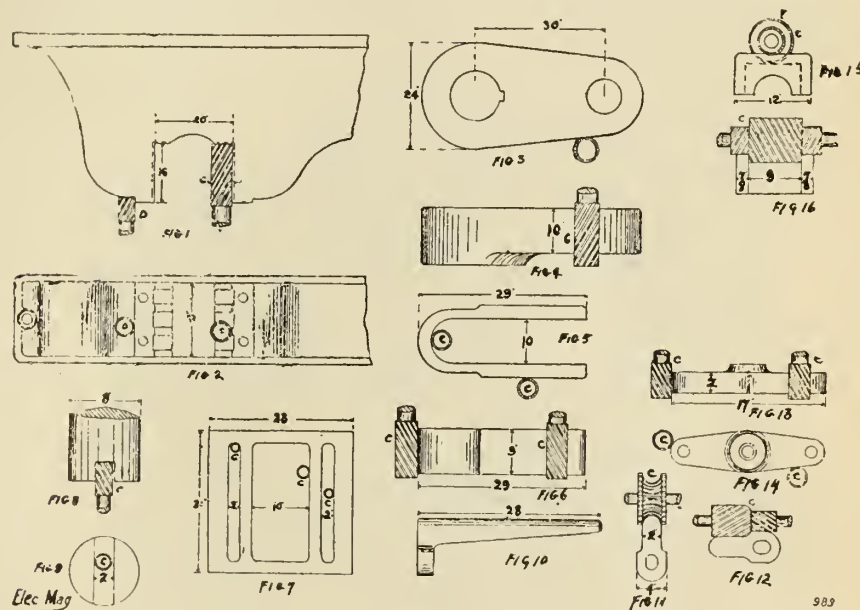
shows the plan and Fig. 4 the elevation of a large forged steel crank. This is machined to shape round the edges, as shown, on a large vertical spindle slab miller or plano-miller, the straight sides being done first, the two ends then being finished on the circular milling attachment mounted on the table. The cutter C is 16 in. long and  $7\frac{1}{2}$  in. diameter, and with a roughing cut  $\frac{3}{4}$  in. deep and a feed of  $1\frac{1}{4}$  in. running at 35 ft. per minute, with a good supply of lubricant for cooling the cutter. For finishing, the speed is increased up to 50 ft. per minute, with a feed of  $2\frac{1}{4}$  in. per minute and a cut 1-16 in. deep. These cranks when slotted took a fitter twenty-one hours each to file up and polish. The milling cutter with lubricant leaves a fine finish and the job now takes eight hours each, only to polish up.
